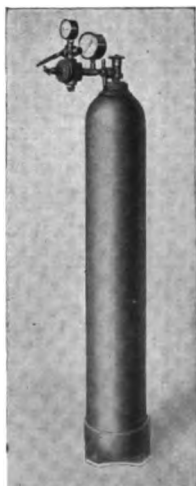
OXYGEN STORAGE TANK, SHOWING PRESSURE REDUCING VALVE (Linde Air Products Co.)
